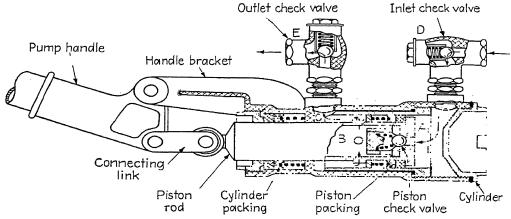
Schematic diagram of a hydraulic hand pump for a Douglas DC-3 hydraulic system.
